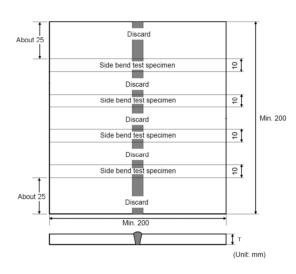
Dimensions and types of test assembly for butt welds(T≥12mm)
